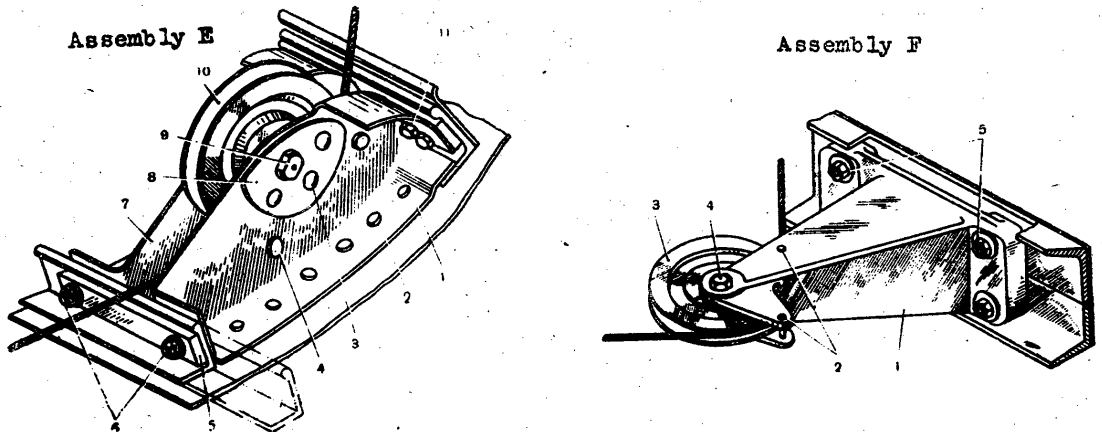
Installation of the support bracket with rollers in the fuselage, engine nacelle and wing.
